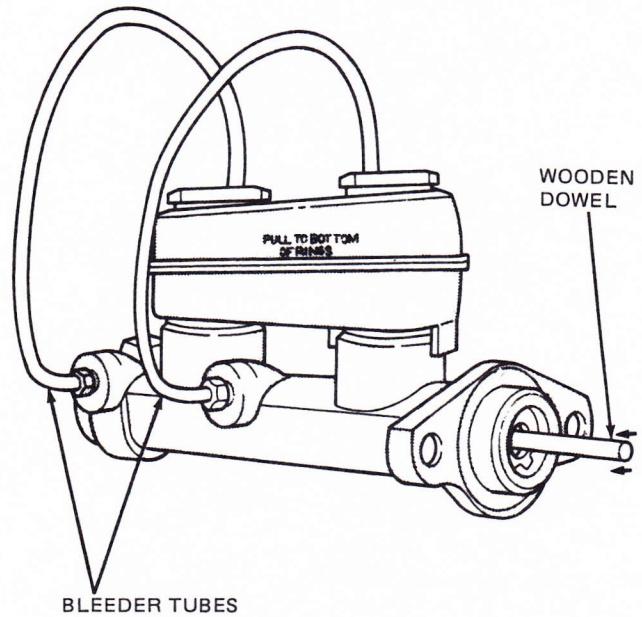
Install bleeder tubes and operate the pistons with a wooden dowel to bench-bleed the master cylinder. (Chrysler Corporation)
